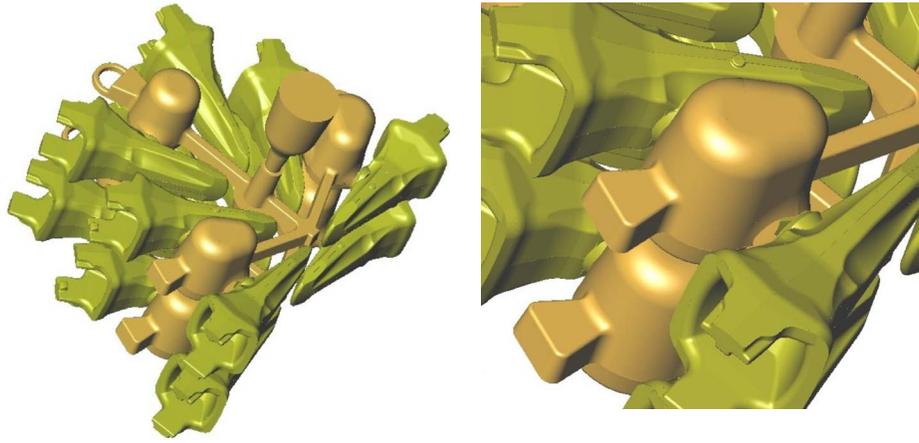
Sand gravity casting; CAD geometry of the foundry system
